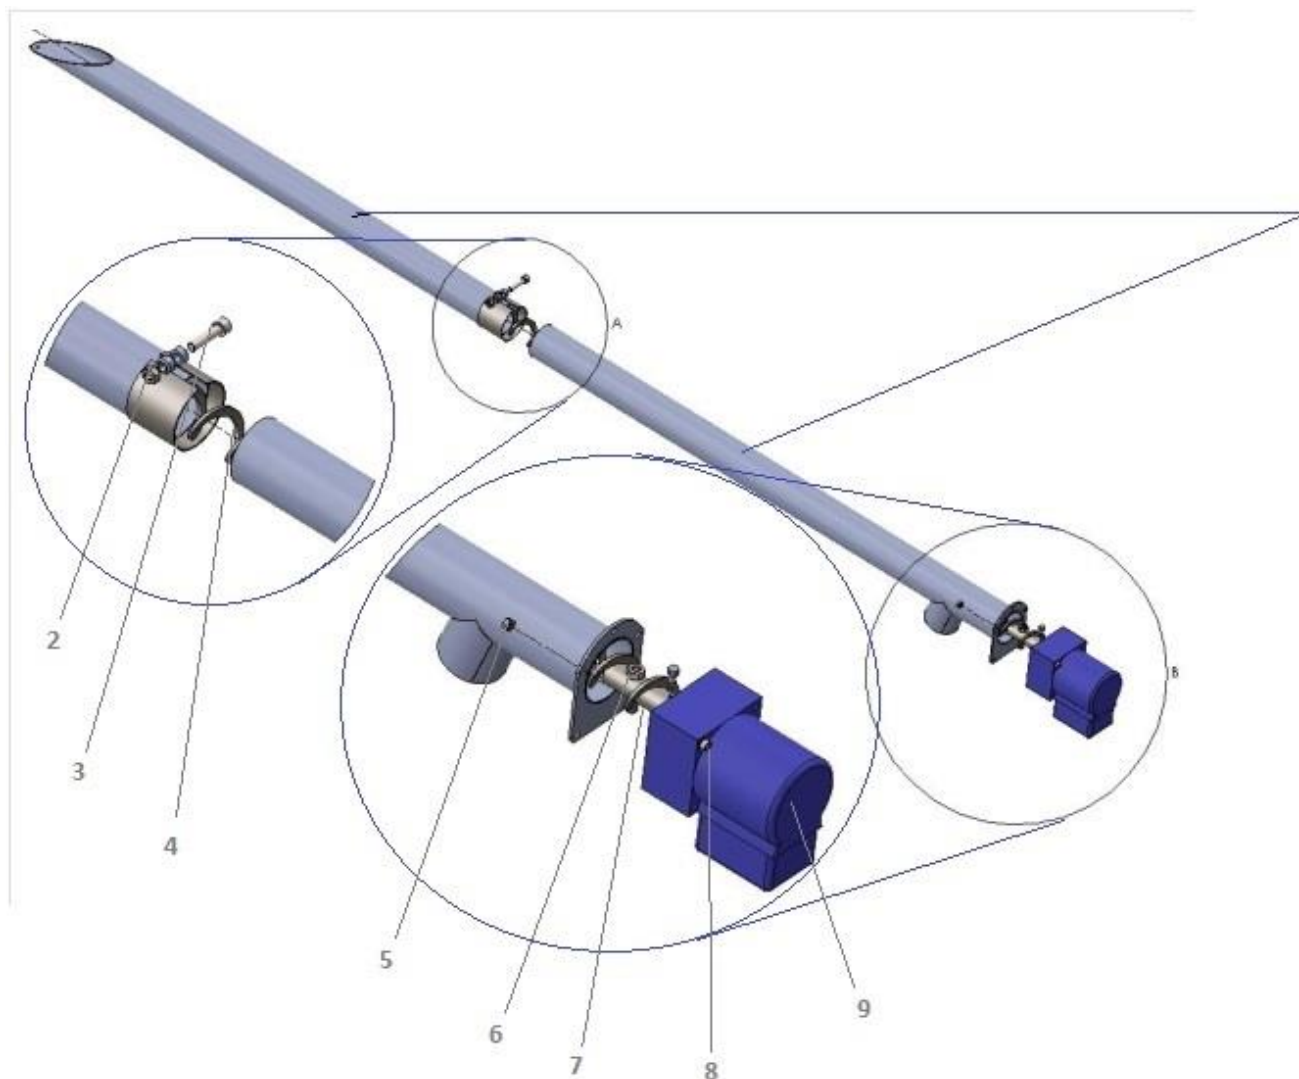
Assembly of pellet feeder. 1 oven tray, 2.nut, 3.screw, 4 spring, 5 bolt, 6.screw , 7.rod, 8 screw, 9. Gearbox with engine motor
